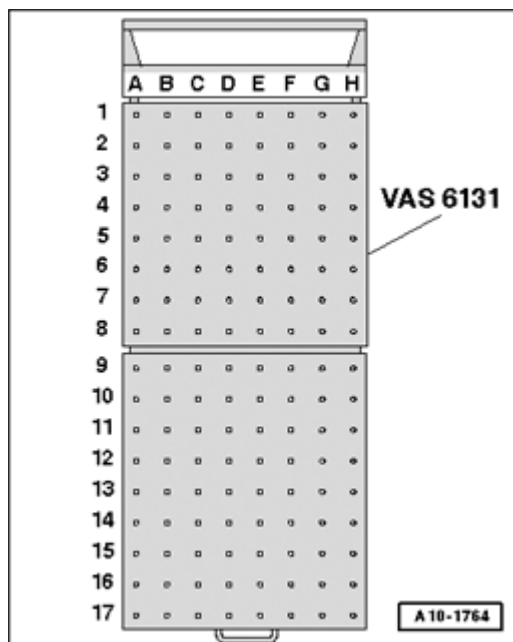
Identifying Scissor Lift Platform VAS 6131
